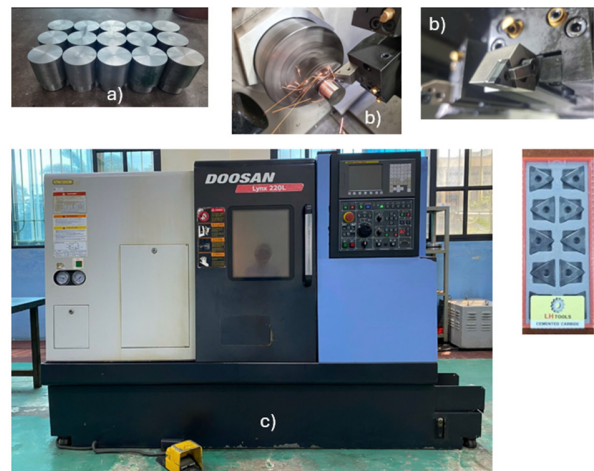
Experimental setup. (a) YK30 workpiece (60 HRC), (b) CBN insert TNGA160404-CBN on tool holder, and (c) DOOSAN Lynx 2100LY CNC lathe.
